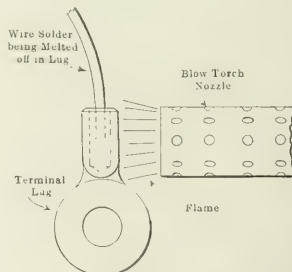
Making Joint with Blow Torch and Solder Wire.
